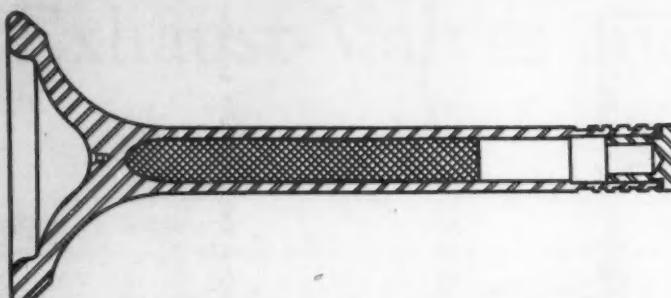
THE INTERNALLY COOLED EXHAUST-VALVE WITH A 1/8-IN. STEM THAT WAS TRIED IN THE TYPE J CYLINDER
